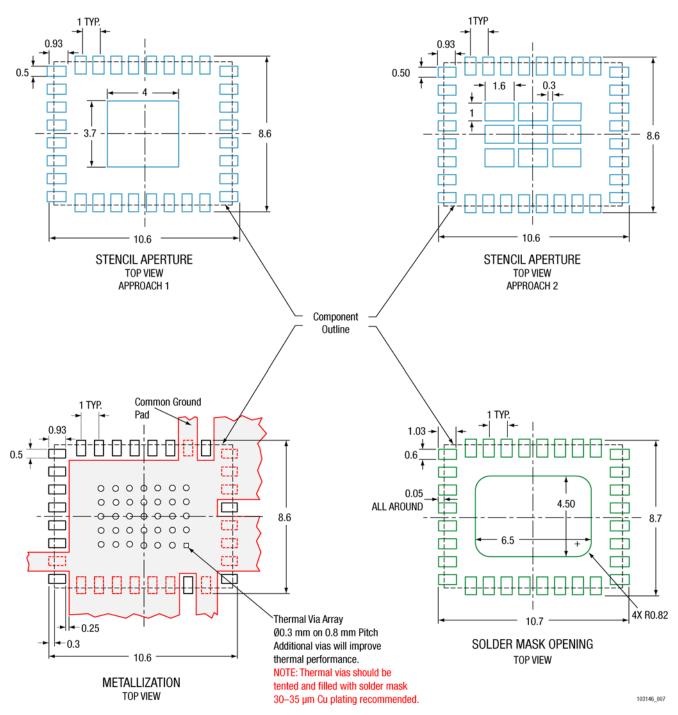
Phone PCB Layout Footprint for 8 x 10 mm, 32-Pin Package - SKY77500
